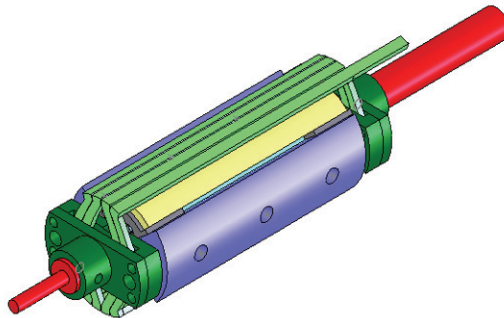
Core 2 and core 3 added to the partial stator assembling.
